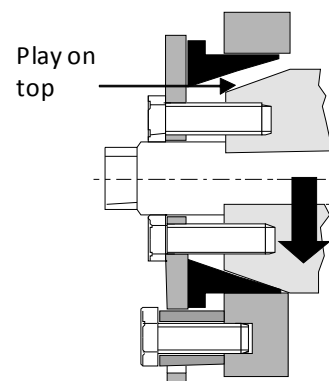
A heavy load on the bolt prevents complete tightening. Unload the bolt before tightening.
